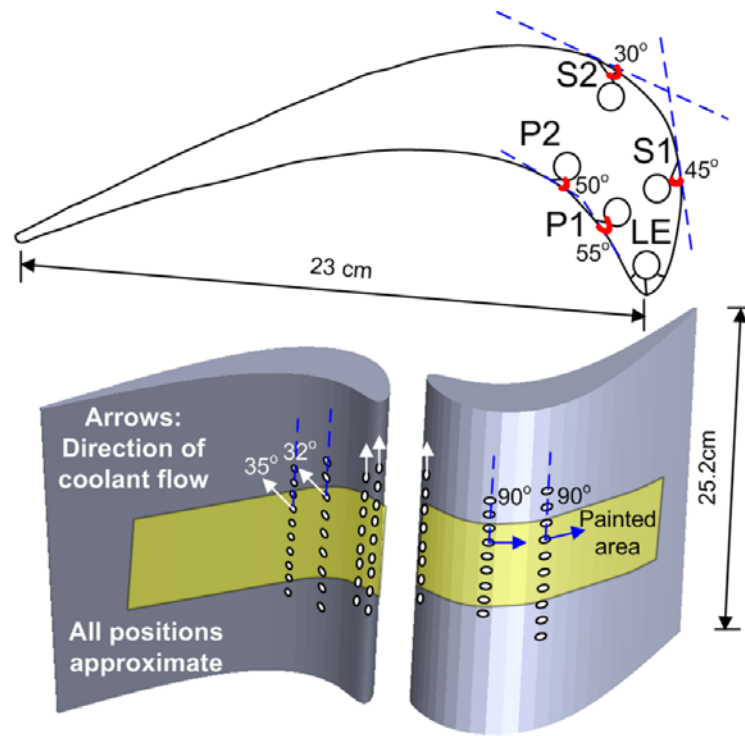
View of blade showing arrangement of cooling holes, coolant supply channels and area painted with PSP
